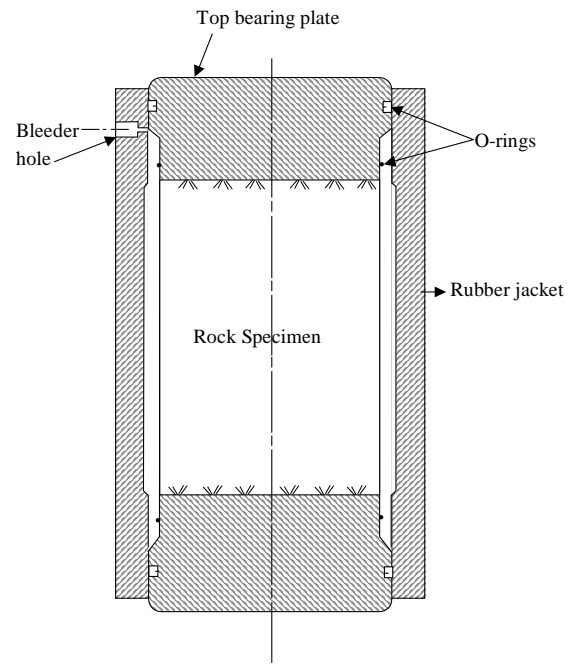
Half section of rock specimen pressure jacket and bearing plate assembly
